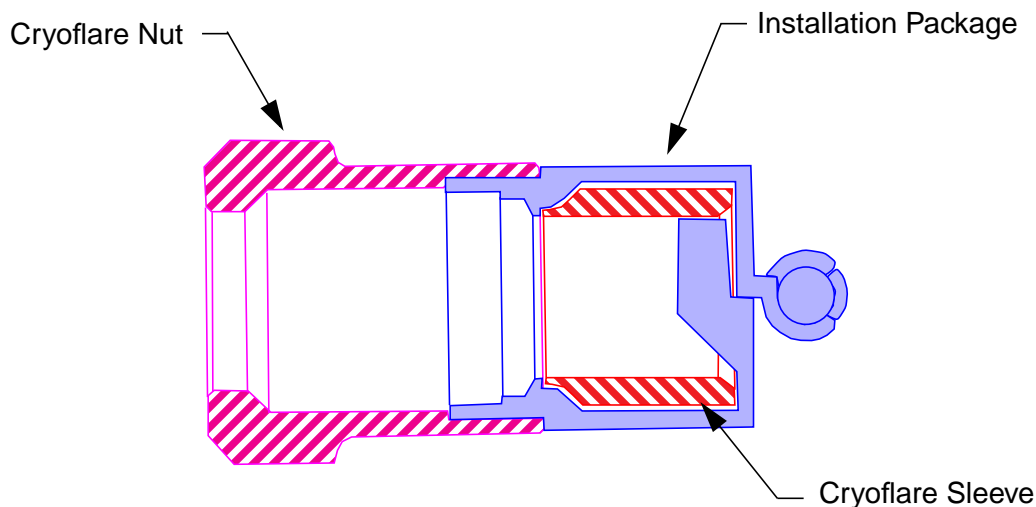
Cryoflare Sleeve/Nut with Fitted Installation Package
